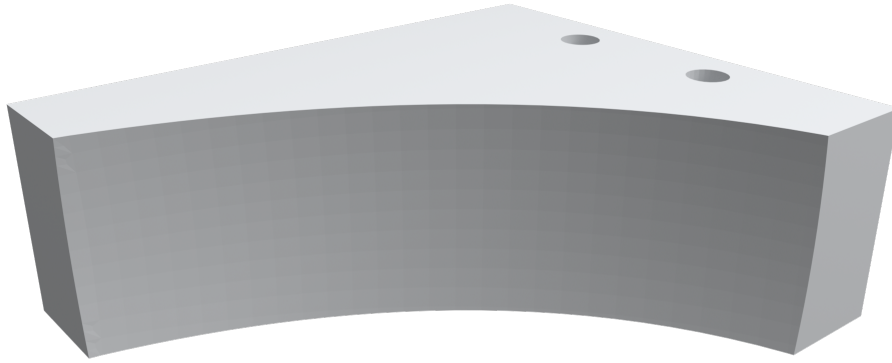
The crystal geometry is cut into an aluminum block. Two mounting holes are placed outside the elliptical surface.
